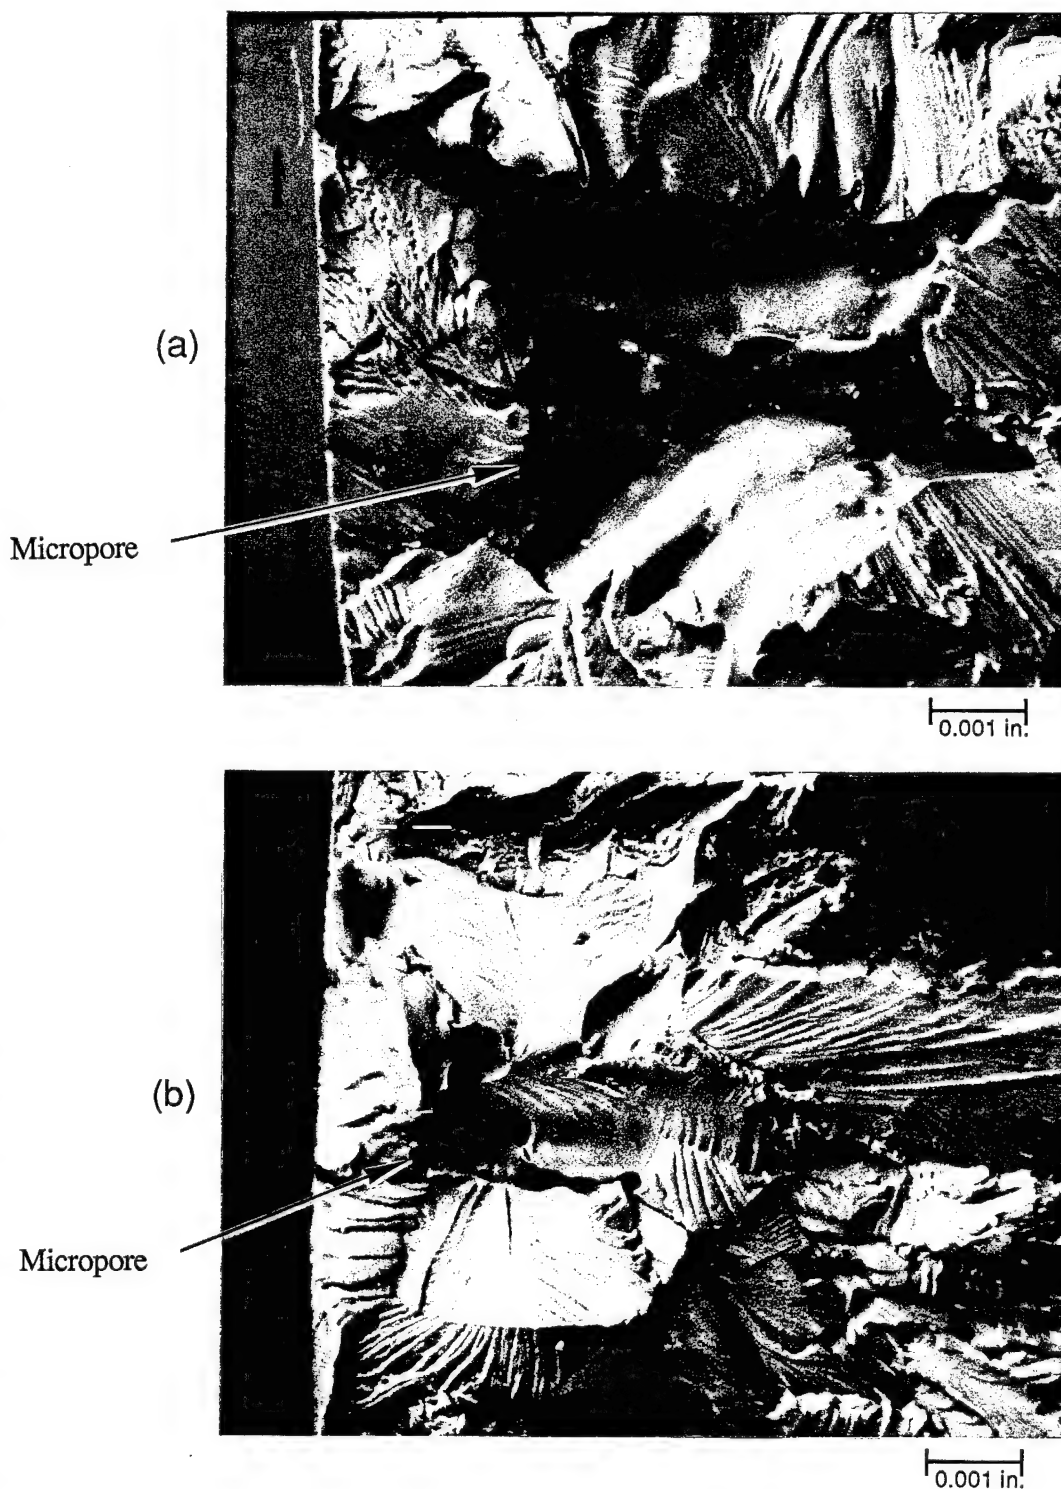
Typical smooth fatigue crack initiation from pores in 7050 plate. (a) *Old material*, maximum pore length = 0.0069 in. (b) *New material*, maximum pore length = 0.0027 in.
